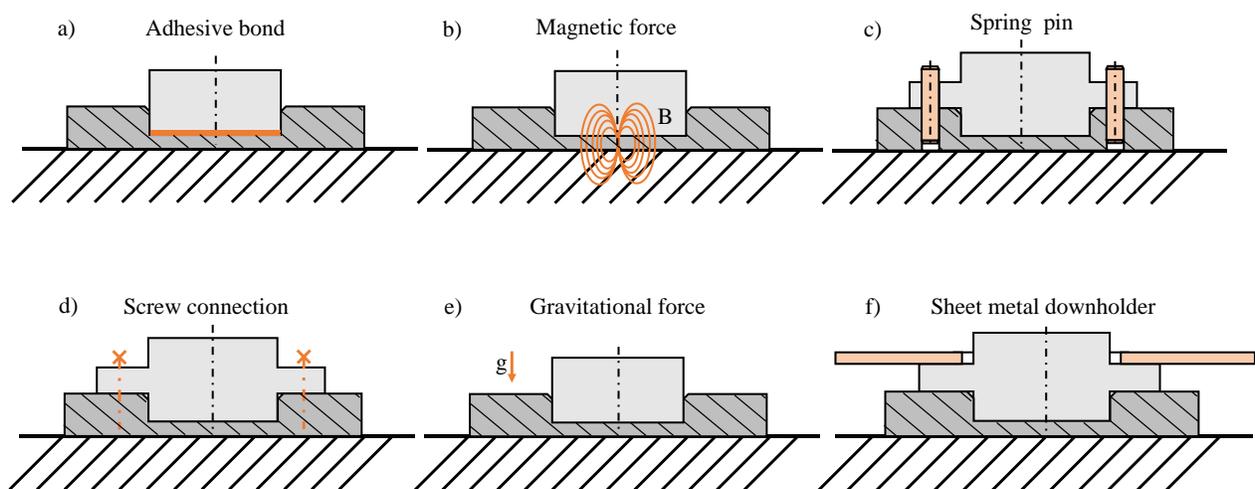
Concepts for fastening milled parts in the additive manufacturing process.
